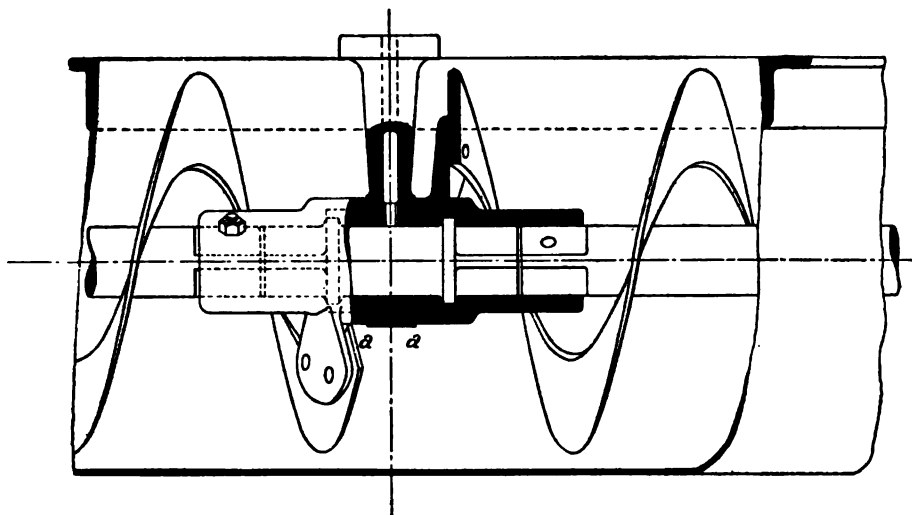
Dustproof Conveyor Bearing made by the Conveyor and Elevator Co., Accrington, England.
